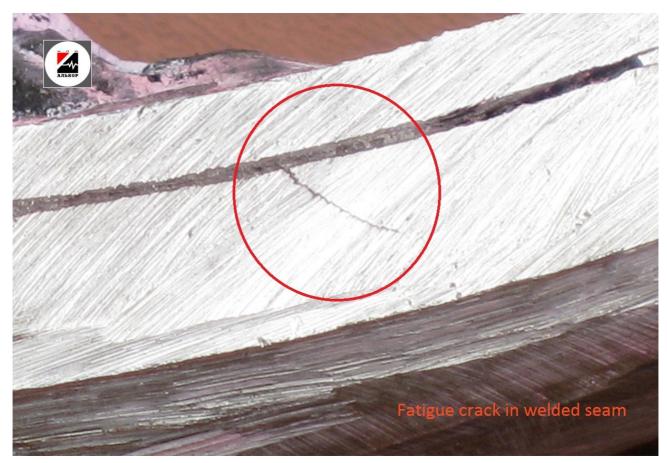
The fatigue crack which has been found out ISHM «Pecypc-2000» in a welded seam of the refinery pipeline.
